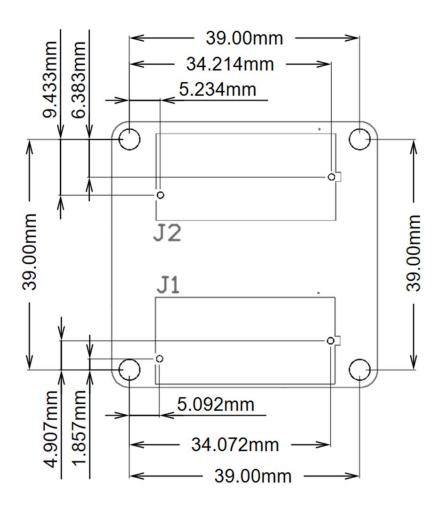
MitySOM-QC5430/6490 Mounting Hole Location
